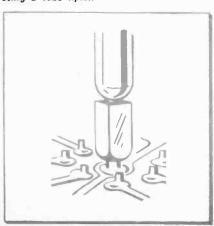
Socket contacts are removed simultaneously by using a cup tiplet having the correct diameter.
